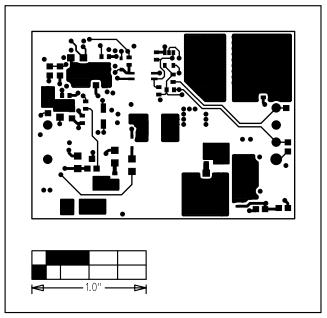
MAX5051 EV Kit PC Board Layout—Solder Side
